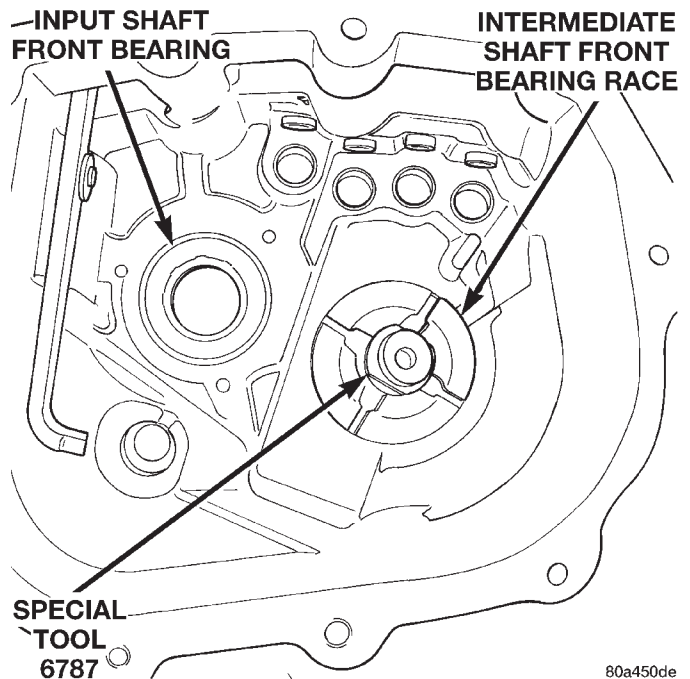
Special Tool 6787 Installed in Bearing Cup
